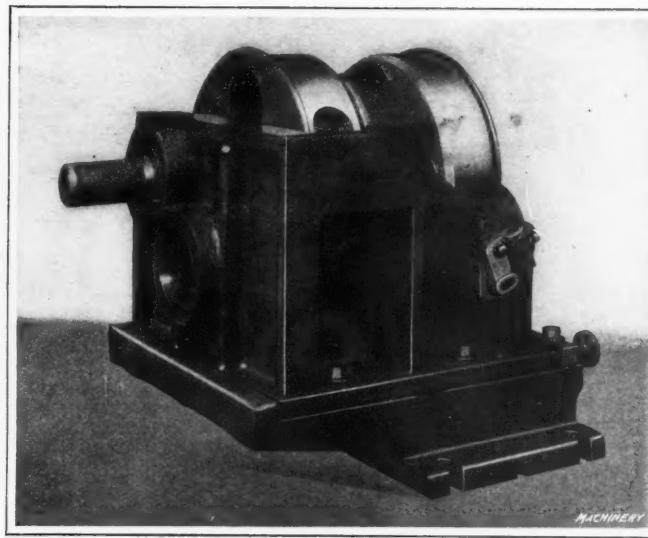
Fixture used on Heald Grinder for finish-grinding Spindle Bearings and Index-pin Bushings in Cylinder
